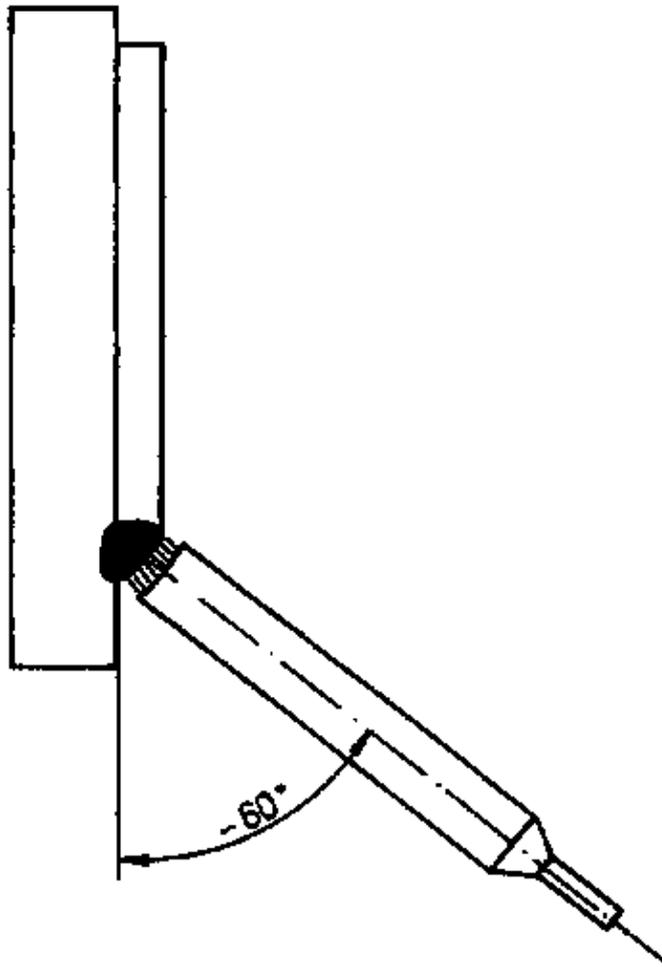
Electrode position for semioverhead edge fillet welding
